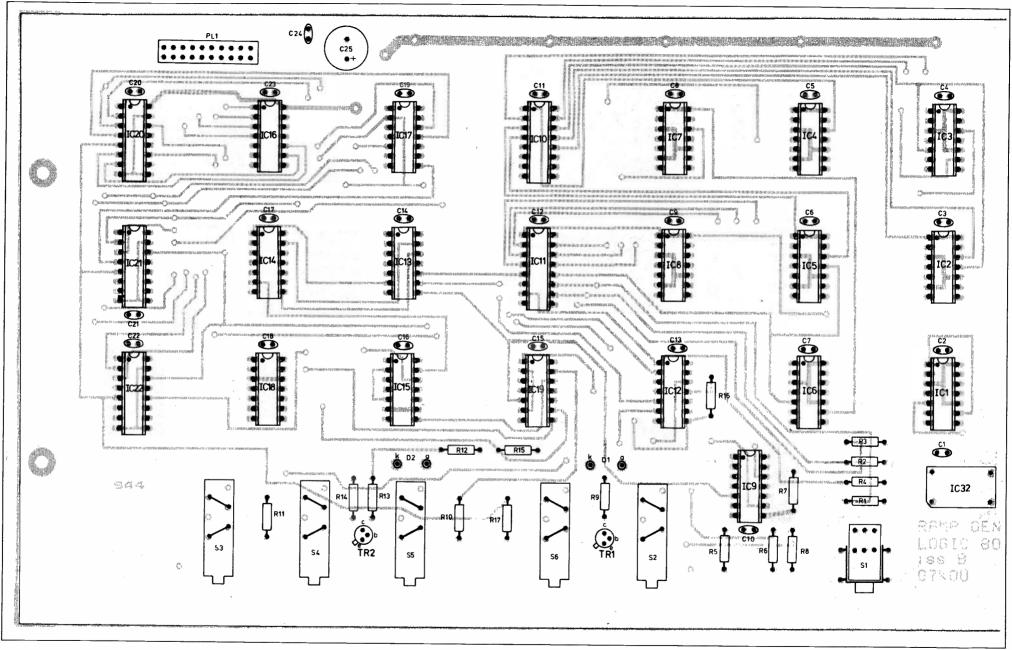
Component layout details for the Logic board of the Ramp Generator. Only the upper side tracking is shown. The horizontal extremes of the board are not shown – they are vacant of components but include the mounting holes.
